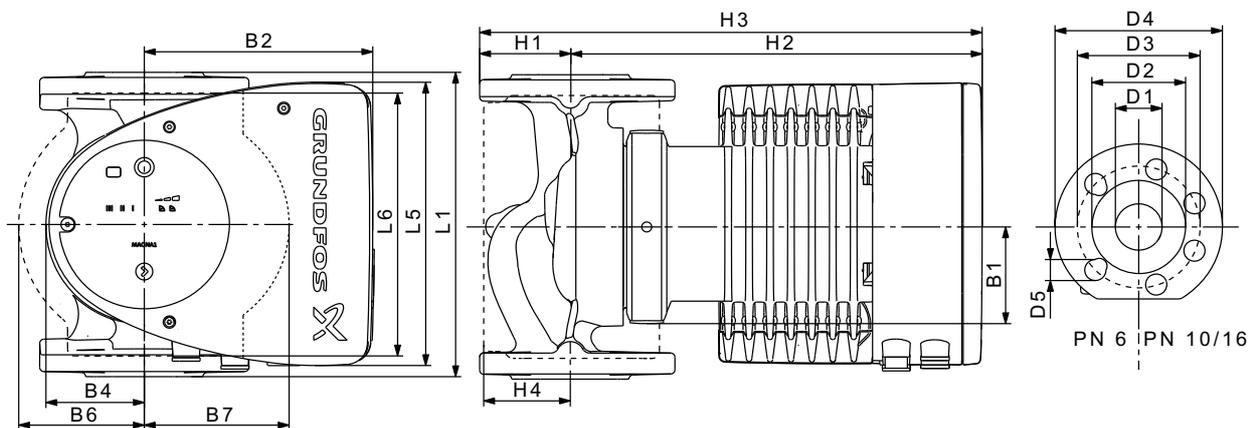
Single-head pump dimensions, terminal-connected versions, flanged version
